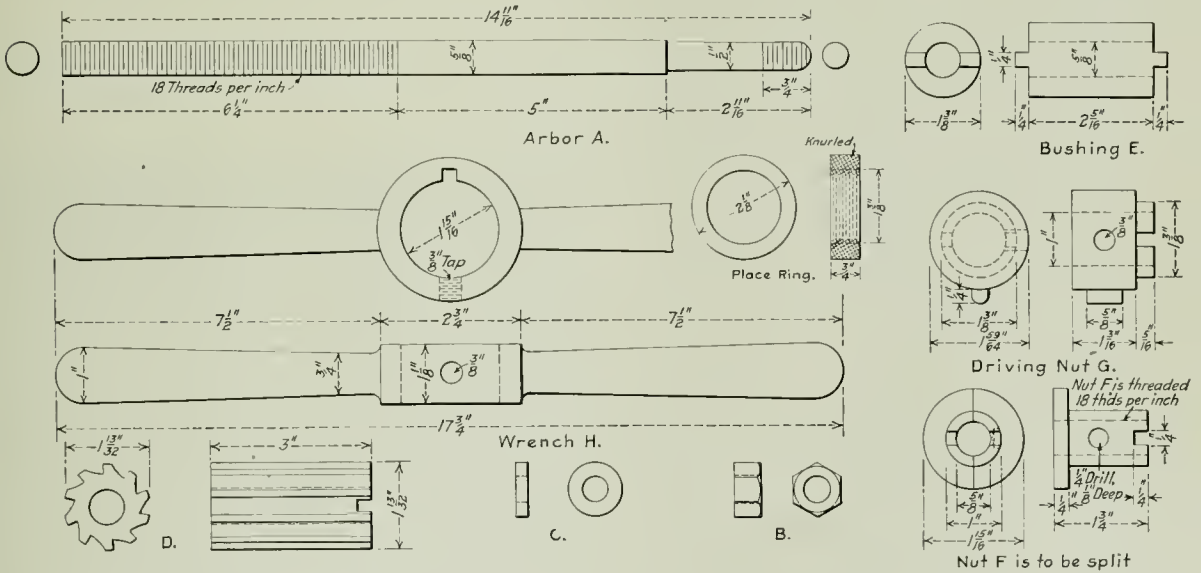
Details of Special Tools for Reaming Out 9 1/2-Inch Pump Reverse Valve Bushings
